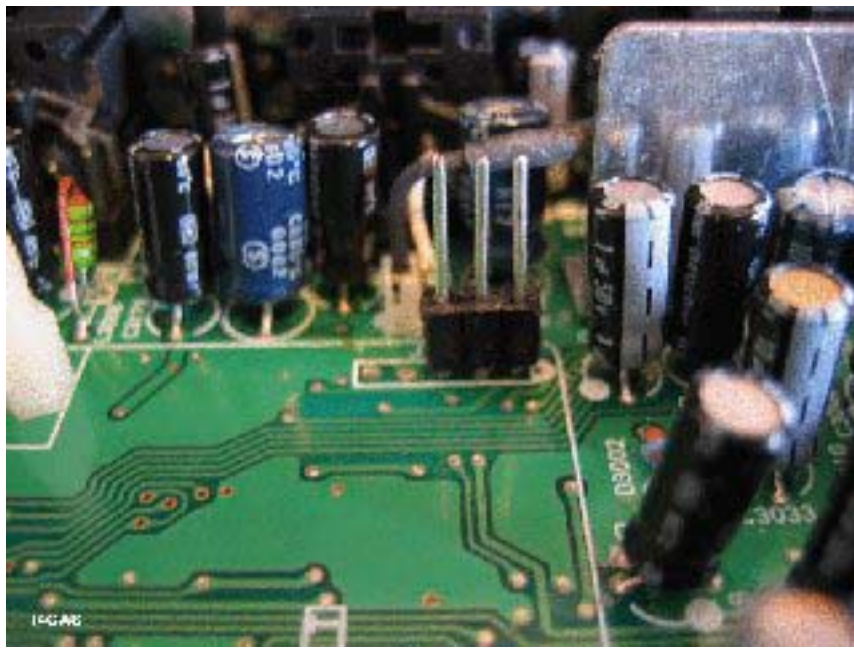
Picture is showing the plug where the INRAD PCB is installed, on the FT1000MP MK V.
